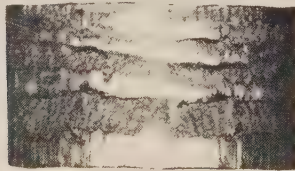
(c).—Sheared Edge of $\frac{1}{4}$ -in. Blank. (Clearance : nil. Thickness : 0.126 in.)
